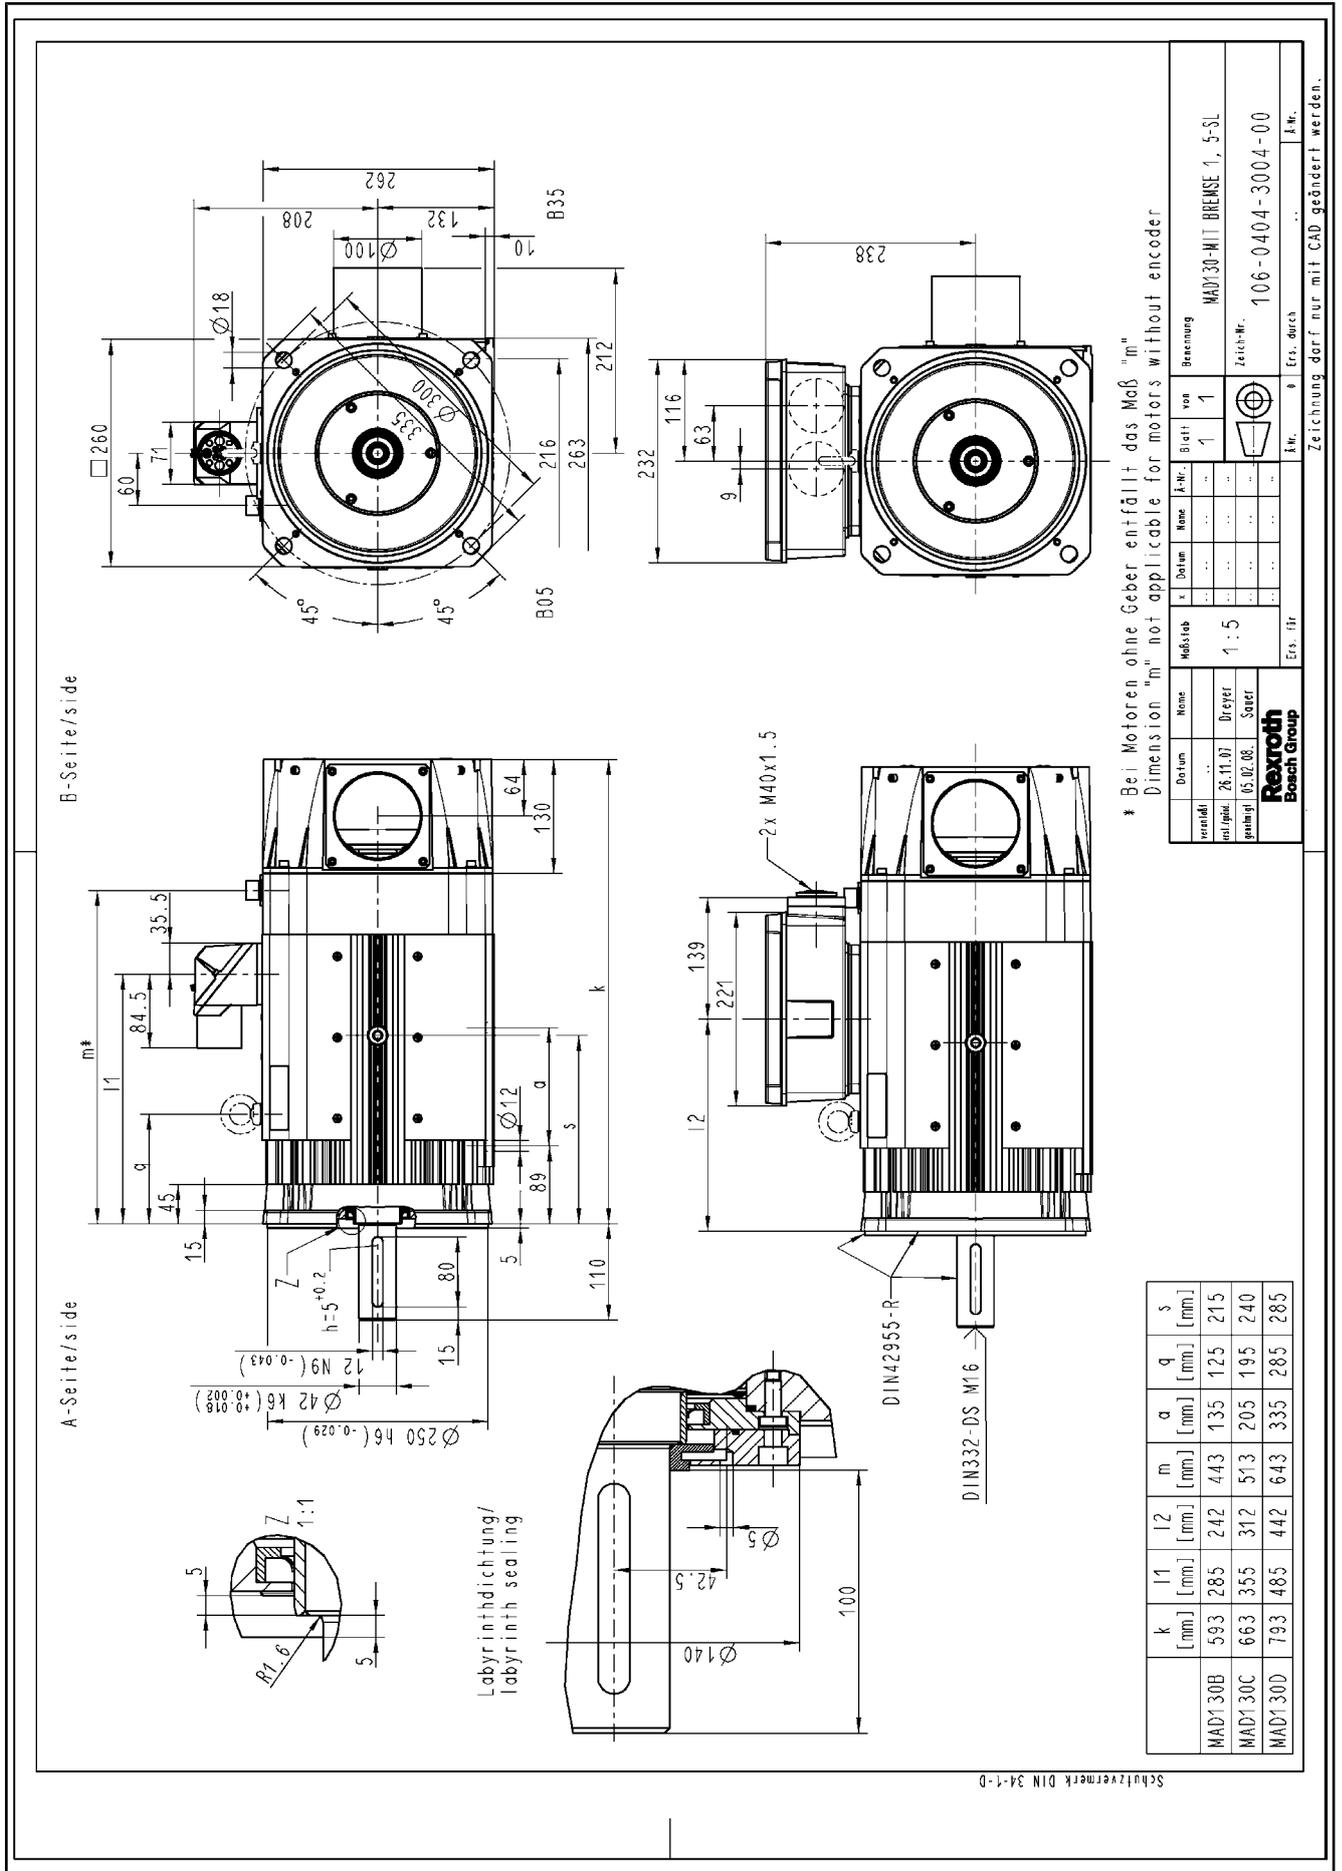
Dimension sheet MAD130 with brake 1/5
